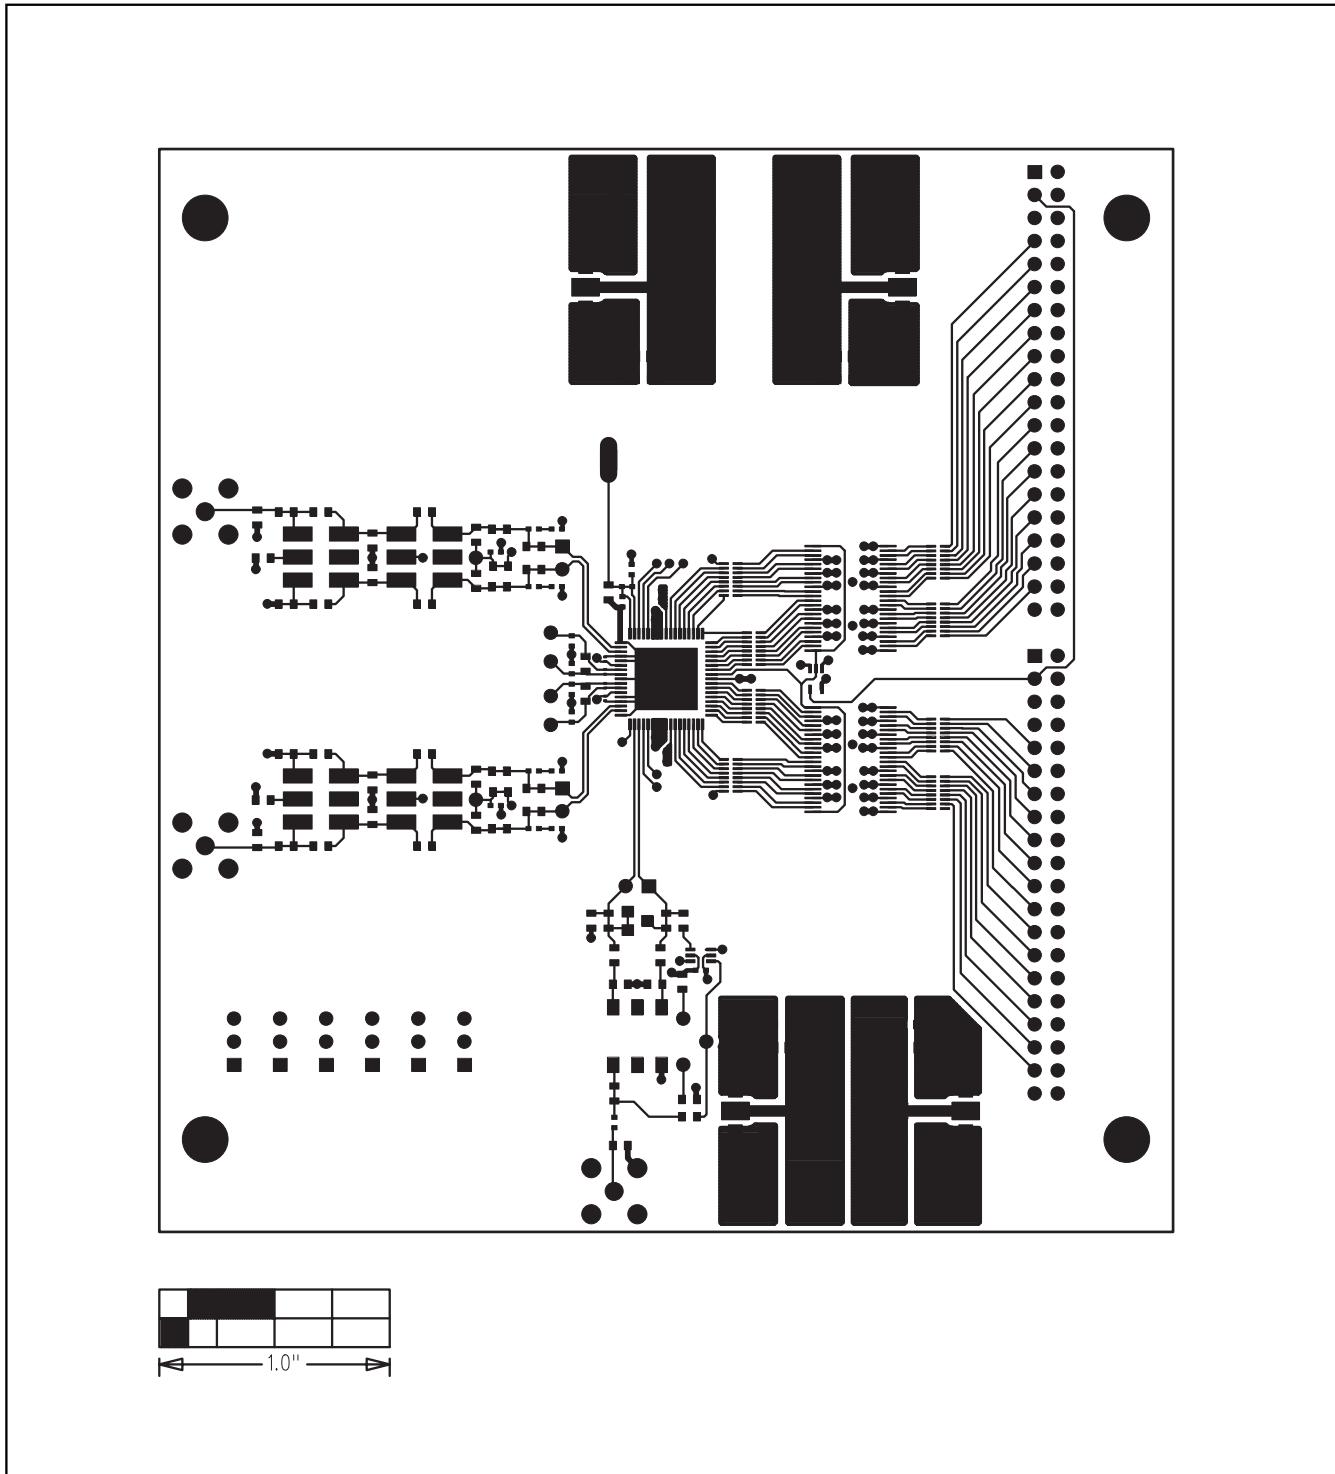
MAX12527/MAX12528/MAX12529/MAX12557/MAX12558/MAX12559 EV Kit PC Board Layout—Component Side
